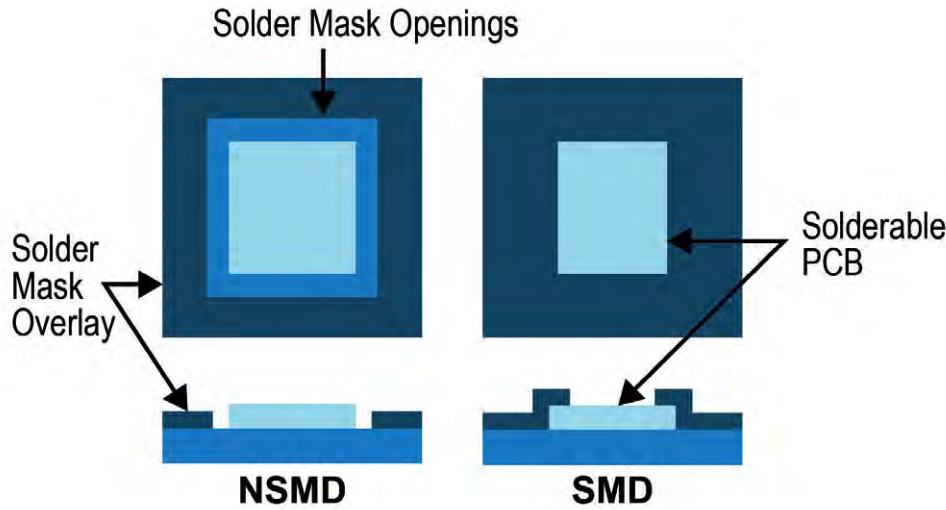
DFN packages are assembled on NSMD pads to ensure the solder can run up the side flanks, in contrast to standard SO-IC packages, which are assembled on SMD pads.
